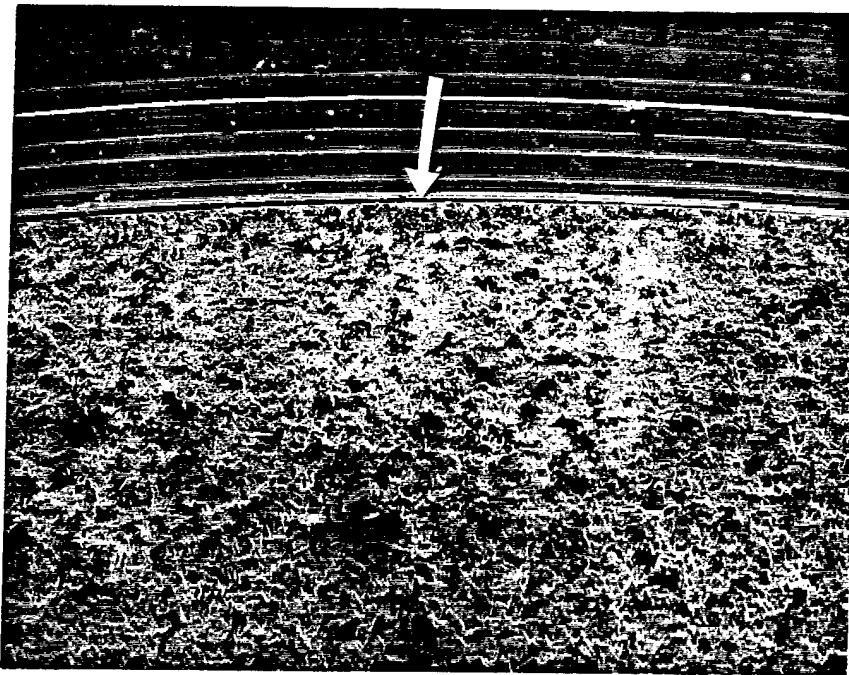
Typical Origin Located on the Fracture Surface of PUR Rod -174 (Mag. 50x).
